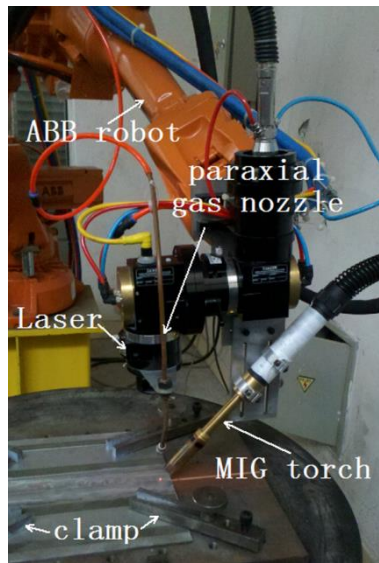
Hybrid laser welding system used in this study [16].
